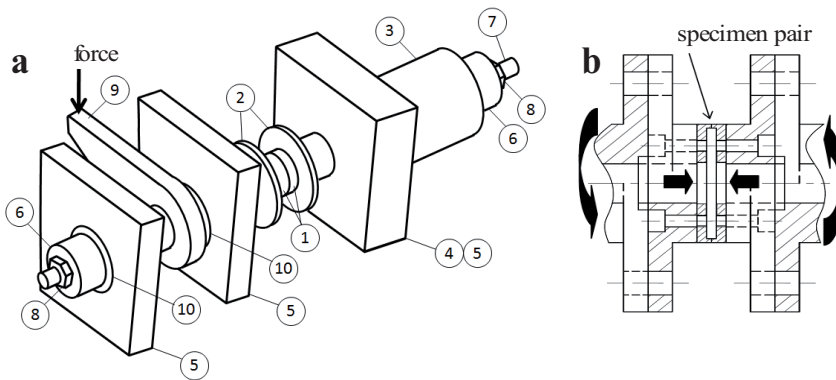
a) Schematic of the testing device. The key components are: (1) specimen pair, (2) specimen holders, (3) axial load cell, (4) torque reaction, (5) support, (6) thrust bearing, (7) threaded rod, (8) nut, (9) torque arm, and (10) rotation bearing. b) Detailed sketch with the applied direct and torsional loads.
